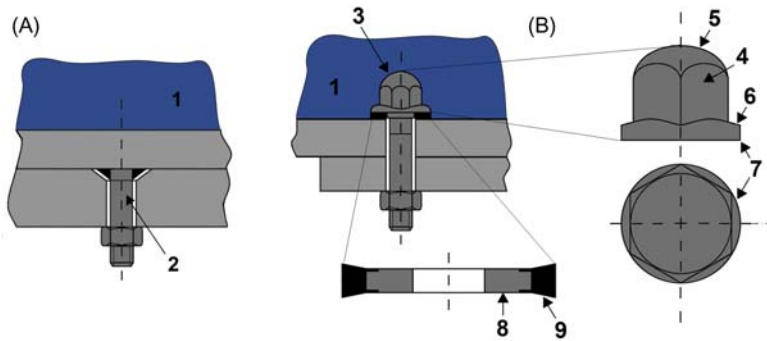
(A) To prevent crevices at the product side (1), screws, pins, or a stud welded on the nonproduct side (2) should be used. (B) A bolt head (3) that is hexagonal (4), domed (5) and provided with a sloped circular collar (6, 7) is easily cleanable, and the metal-backed (8) elastomer gasket (9) is used to seal the thread (Lelieveld et al., 2003; Hauser et al., 2004b).
